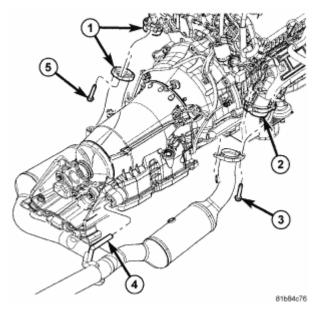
Removing/Installing Exhaust Pipe Courtesy of CHRYSLER LLC
